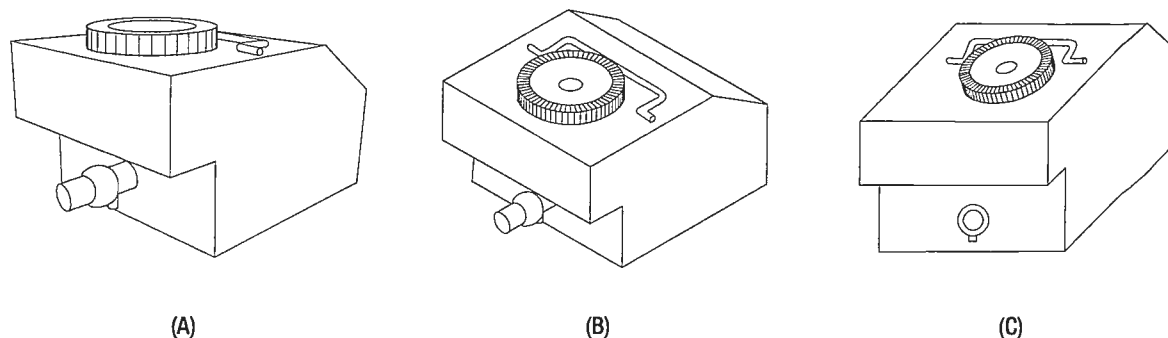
(A) Perspective, (B) isometric, and (C) oblique drawings.
